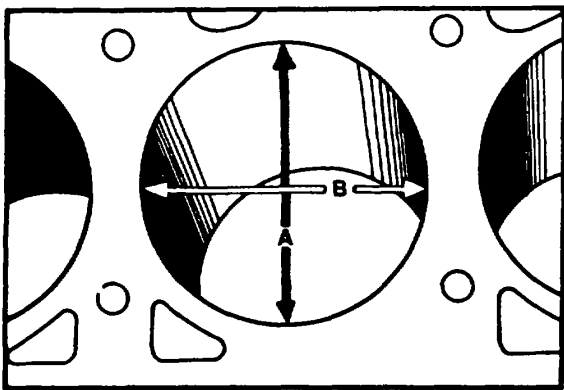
Checking Cylinder Bore with Dial Bore Gauge SE-2331
